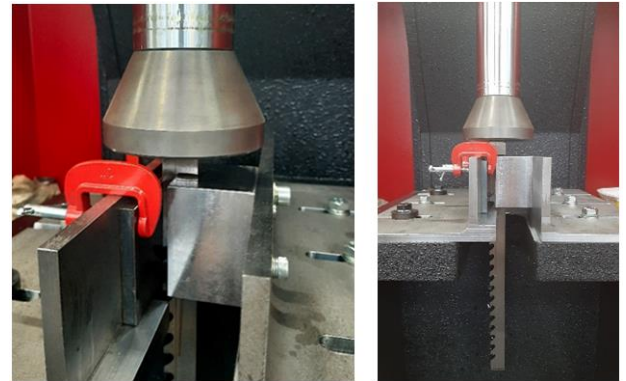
Finishing of the butt weld joint using the innovative method and tool [18, 19]
